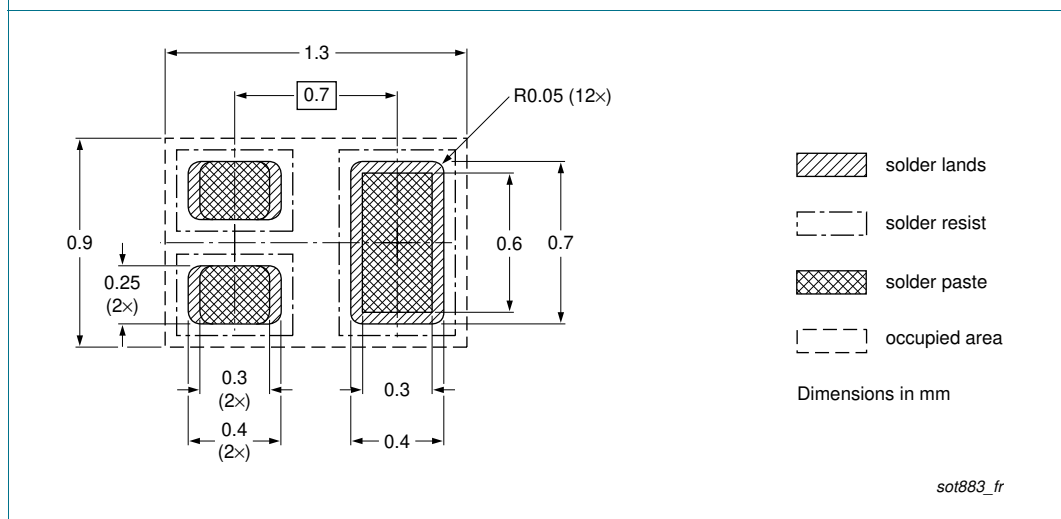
Reflow soldering footprint PDTC124EM (SOT883/SC-101)
